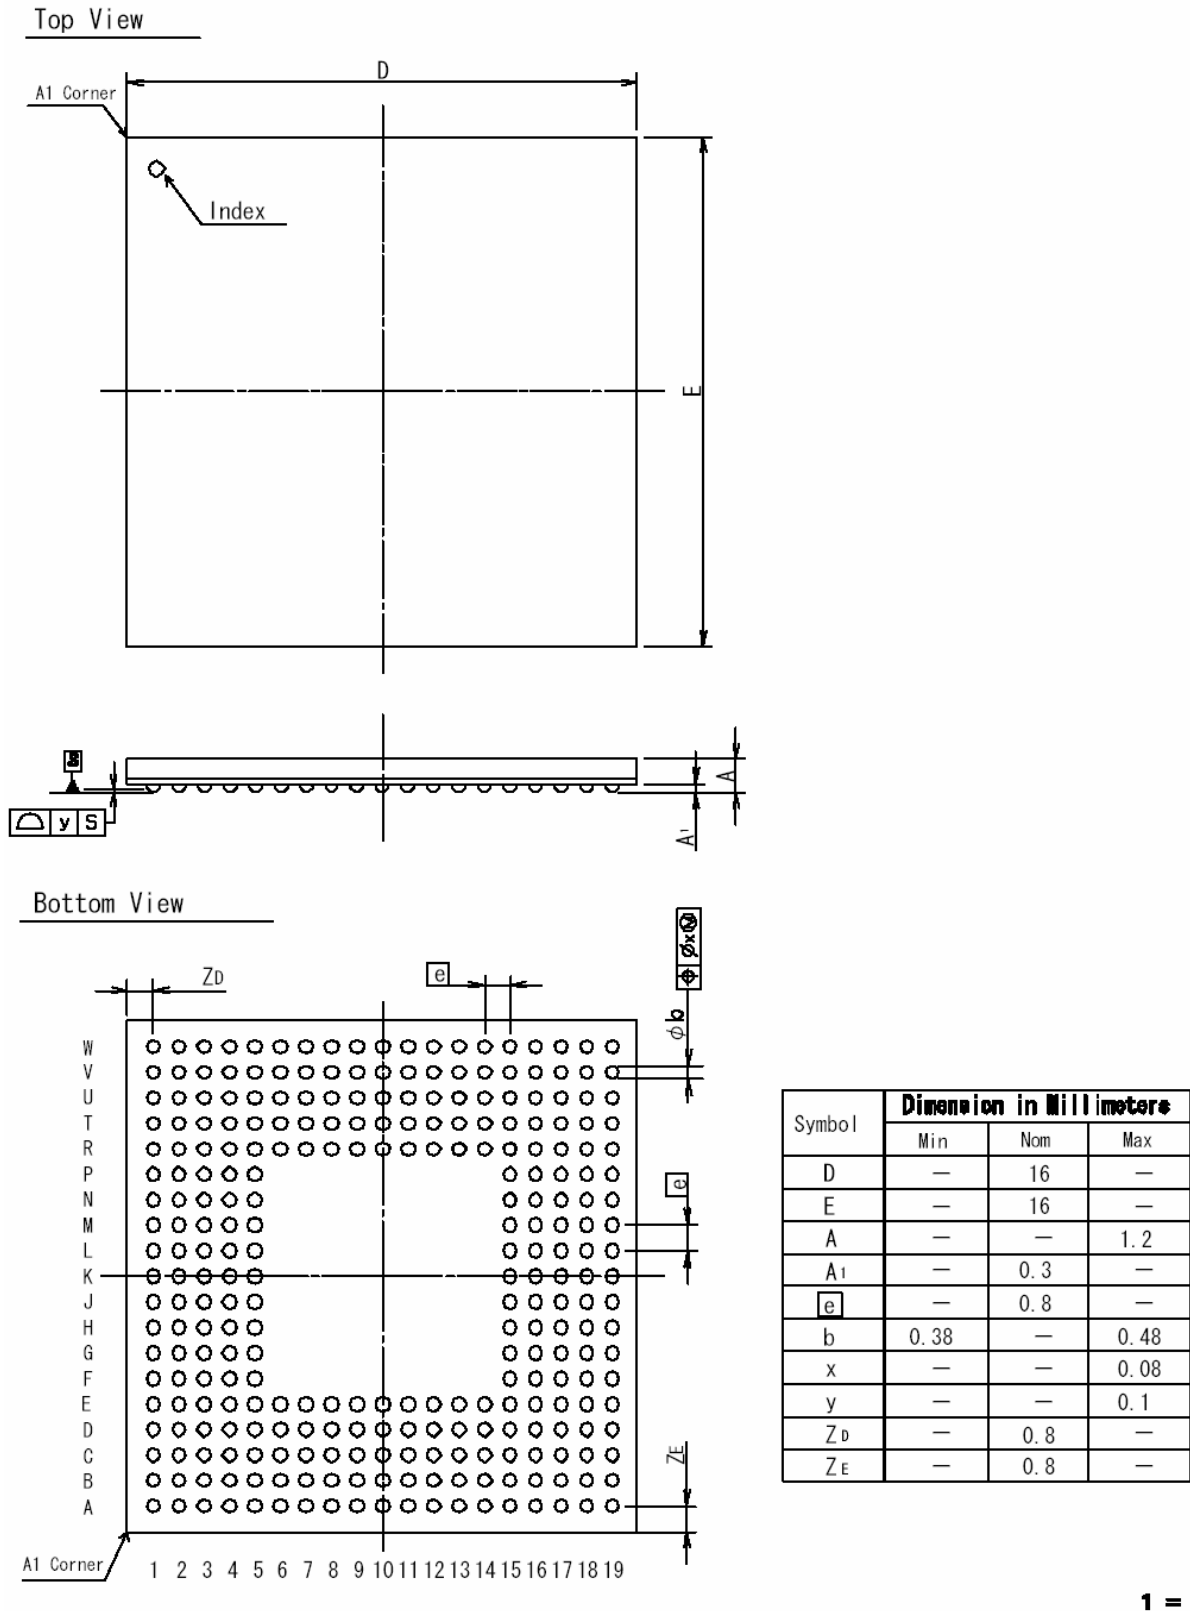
Package Dimensions (PFBGA16U-280PIN)
